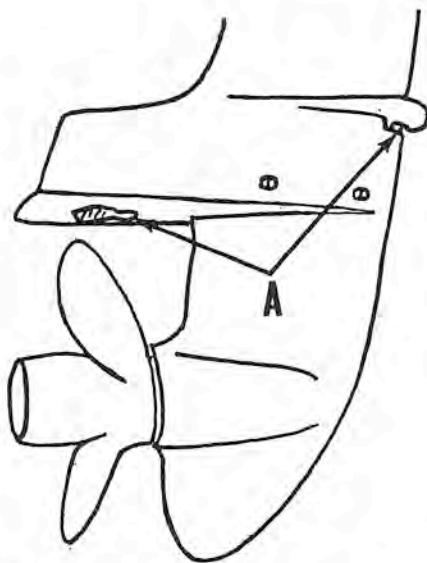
To remove the lower unit gearcase assembly, first remove the attaching stud nuts (A).
